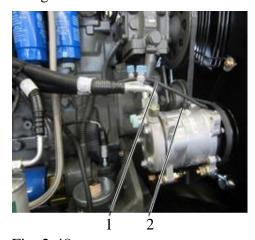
1 Compressor wiring harness 2 Compressor
